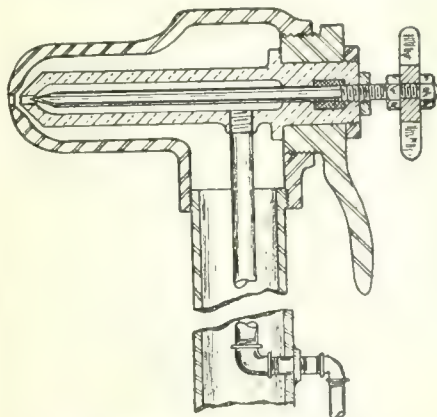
SECTION OF BURNER SHOWING INTERNAL OIL PIPE AND NEEDLE VALVE.
